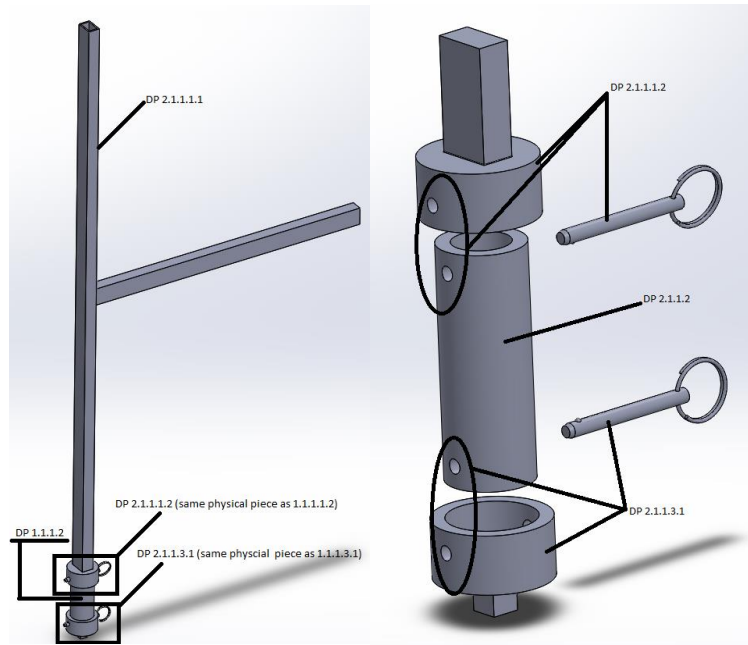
DPs for functional requirement 2.1.1 and its constituents (full system, right; exploded view, left)
